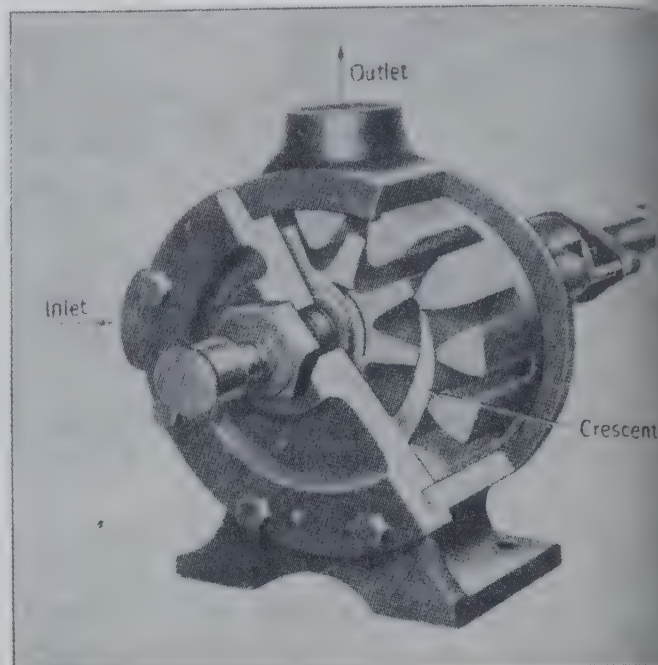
Cutaway view of internal gear pump. (Fairbanks Morse and Co.)
